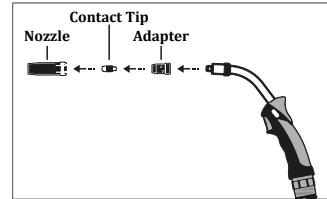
Removing the Nozzle, the Contact Tip and the Adapter
